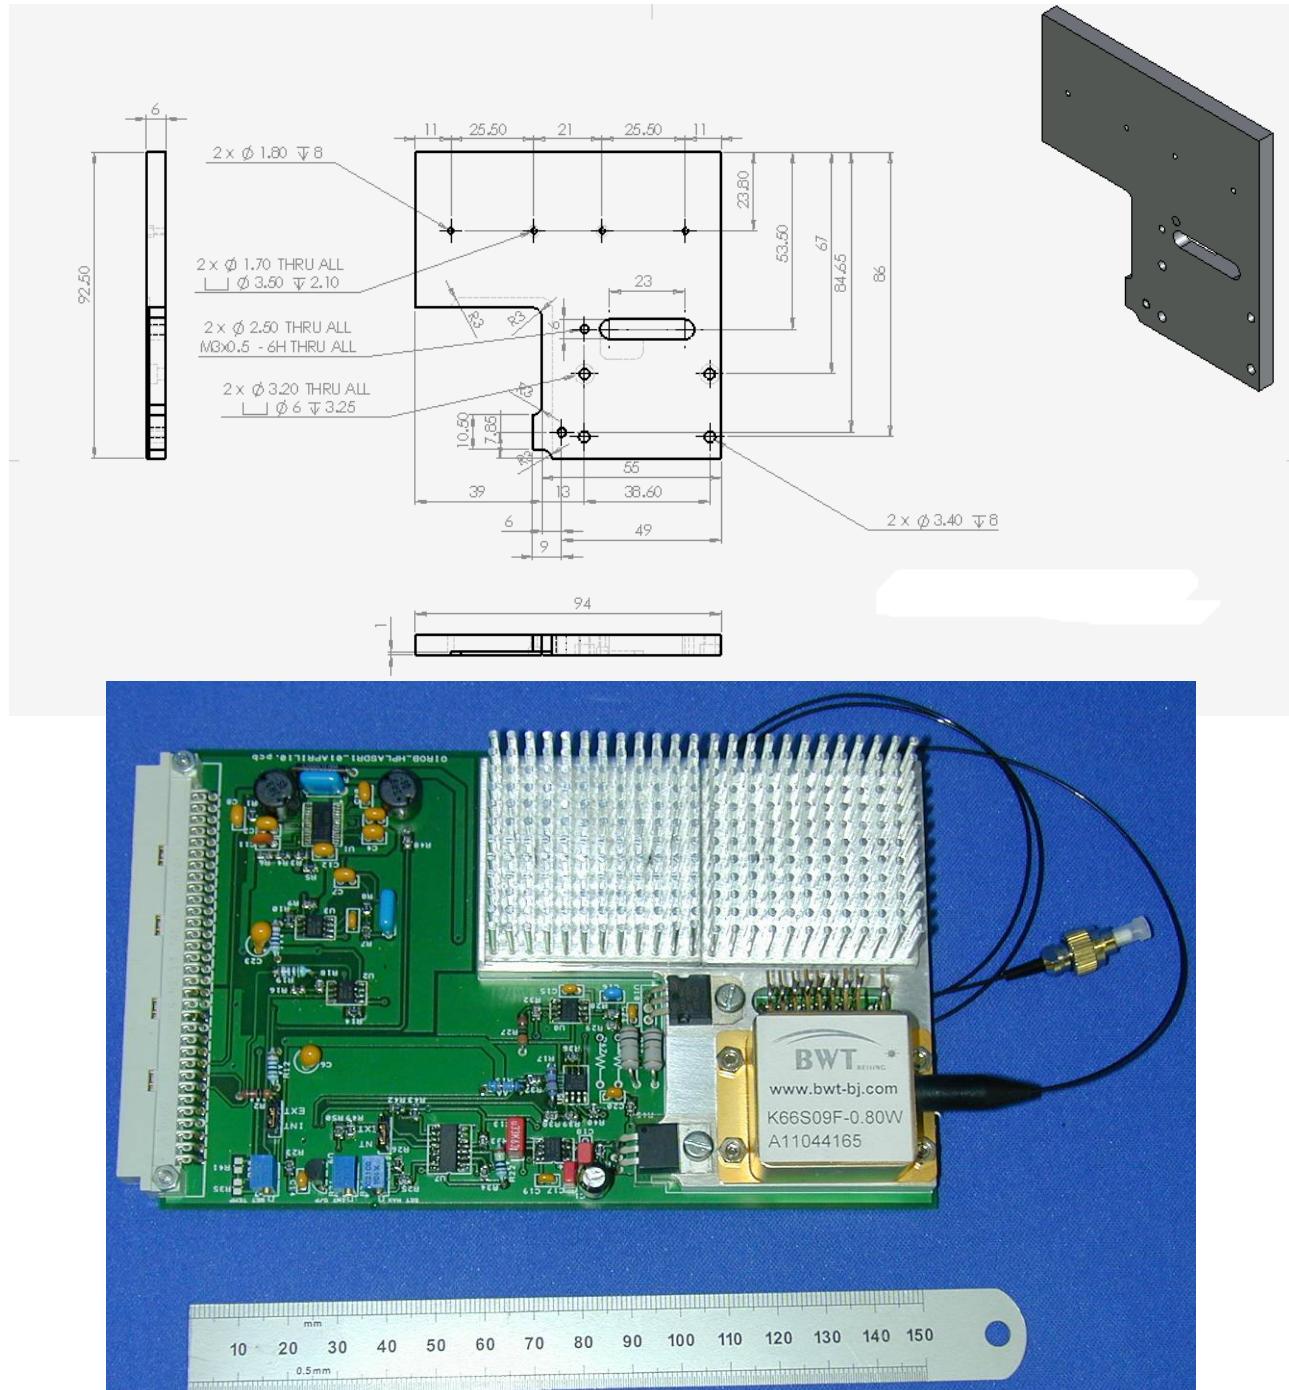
The aluminium heatsink mounting plate (above) and the assembled printed circuit board.
